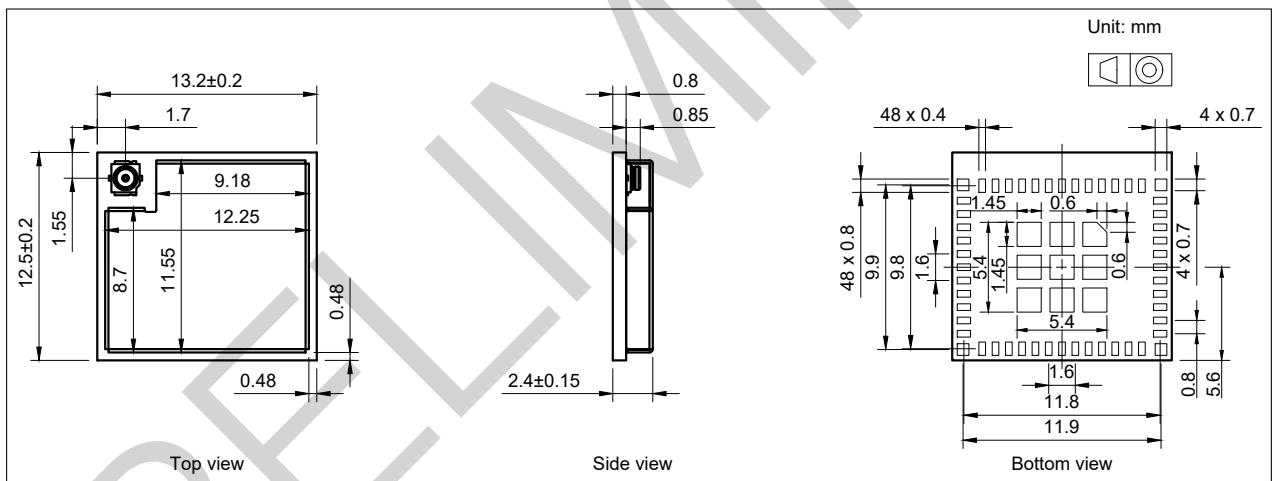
ESP32-H2-MINI-1U Physical Dimensions
